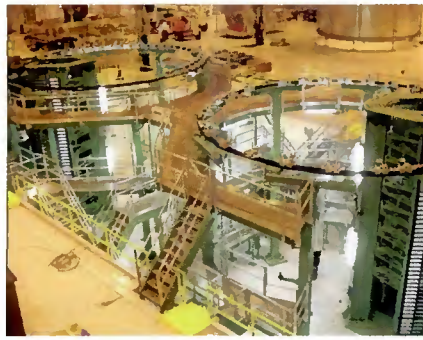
Friction stir welding production tools at the Michoud Assembly Facility.
